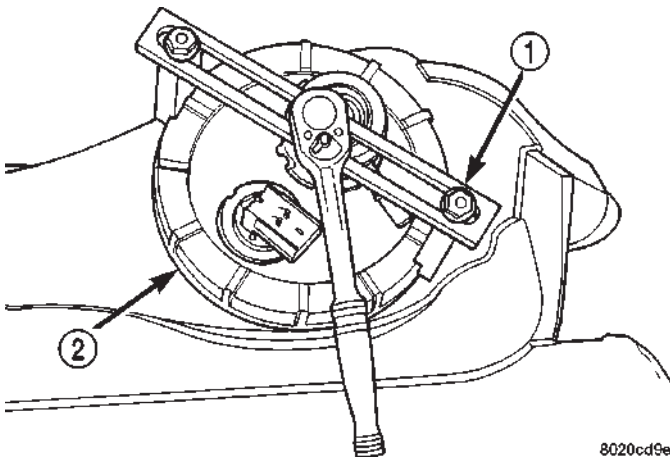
Locknut Removal/Installation—TYPICAL MODULE
